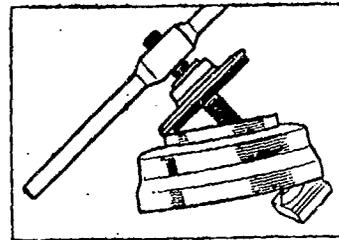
An extractor for the external rings of the internal bearings of the hubs of the front and rear wheels of three-axle vehicles
